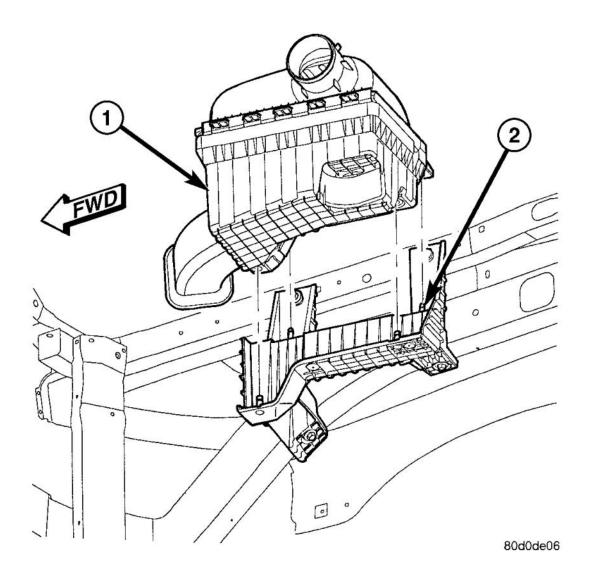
Air Cleaner Housing Courtesy of CHRYSLER LLC
